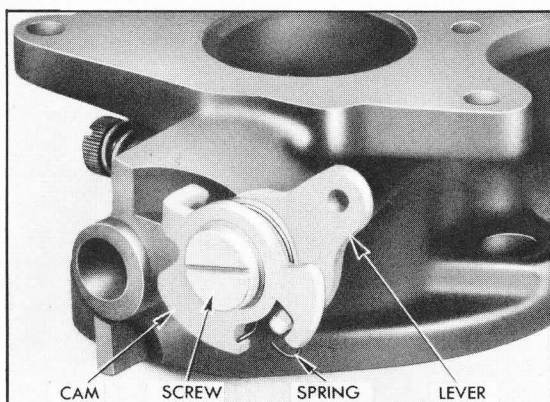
Fast Idle Cam, Spring and Trip Lever
